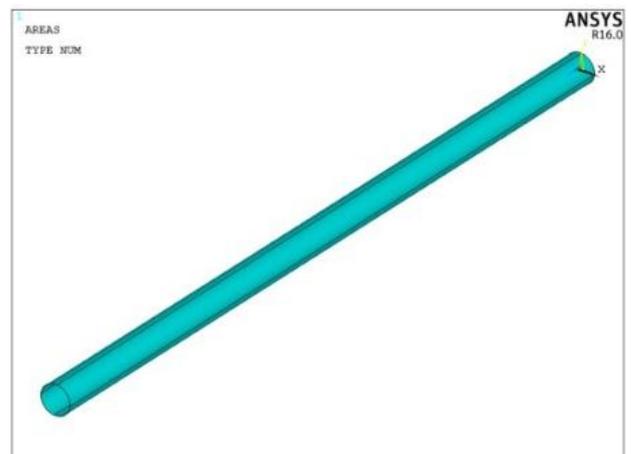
Three-dimensional model of the propeller shaft tube made of carbon composite fiber
